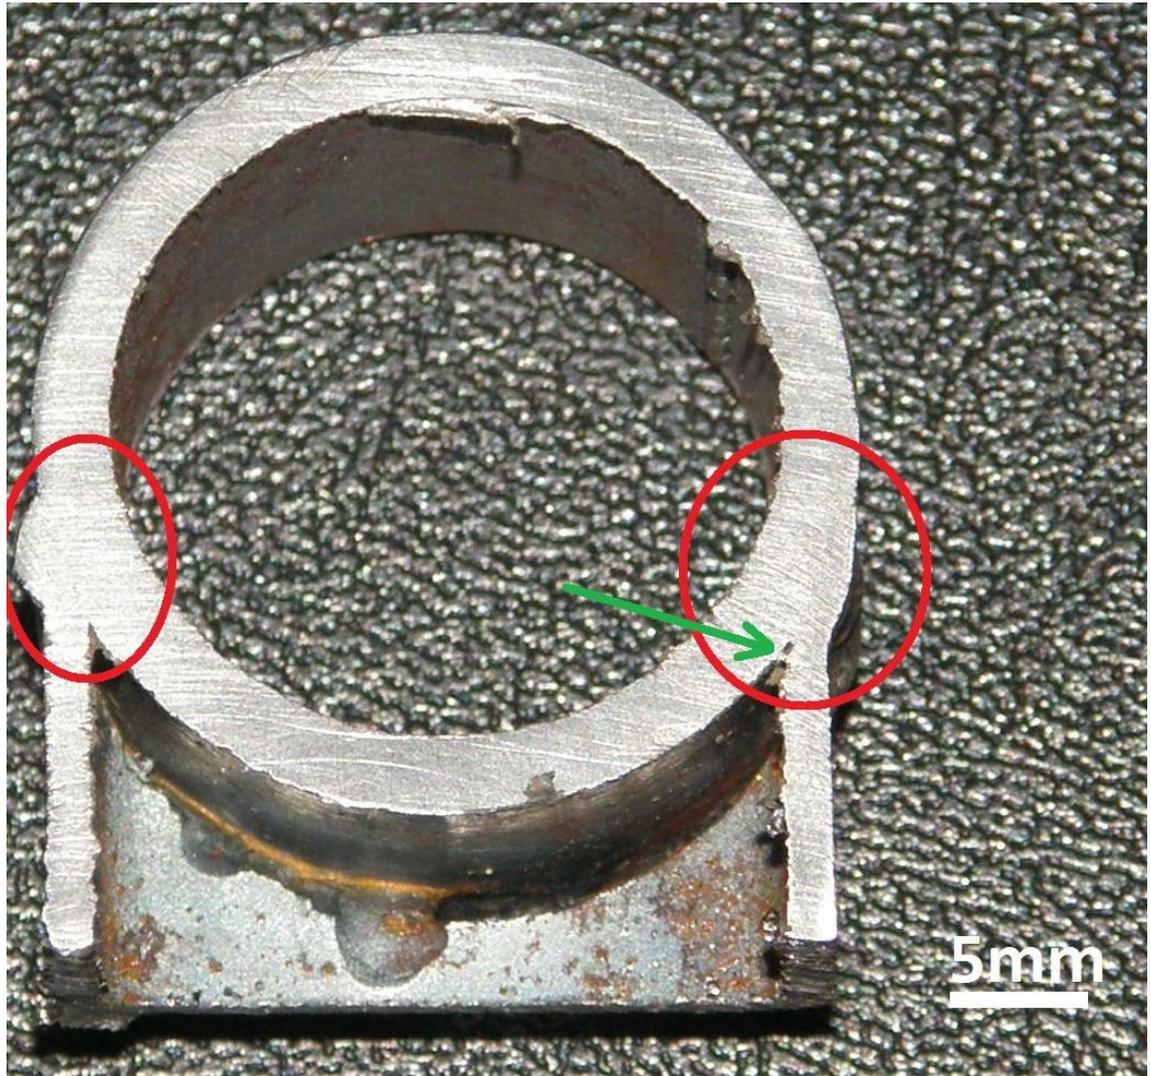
Weld sample square tube welded to roll hoop tubing. Incomplete fusion indicated with green arrow
